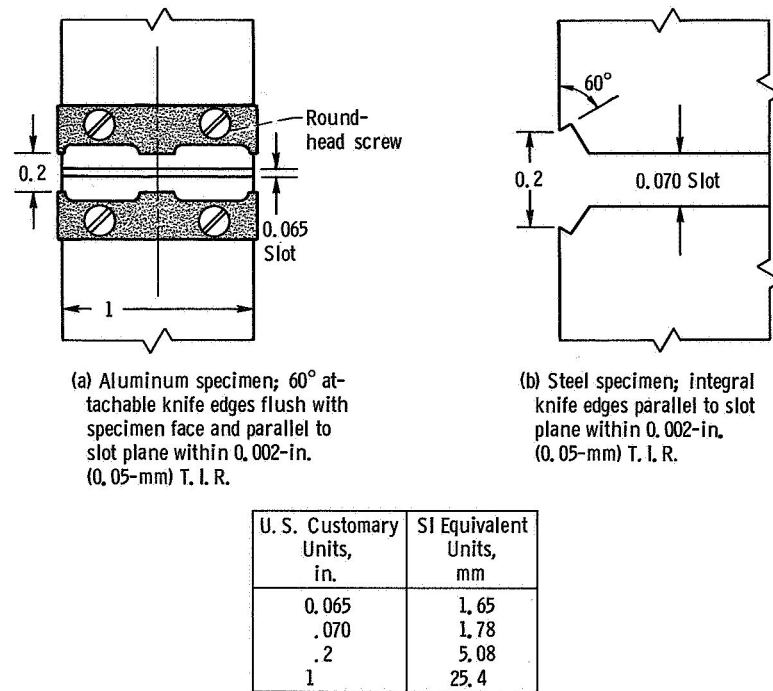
Knife edges for displacement gage attachment. (All dimensions are in inches.)
